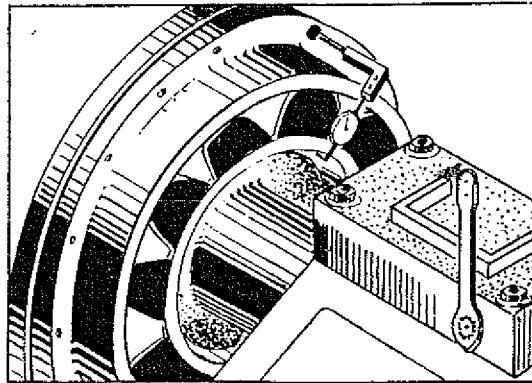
Correcting the Run-Out of the End Face between Gearbox and Flywheel
